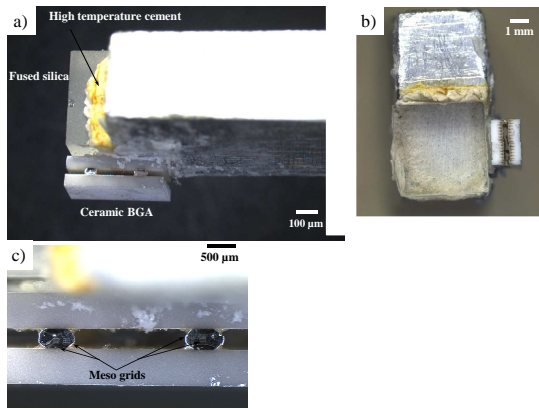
Optical microscopy images of the assembly set-up for testing. *a)* Side view showing the ceramic BGA and the fused silica sample used for depth calibration; *b)* Front view of the set-up and *c)* FIBed mesogrids
